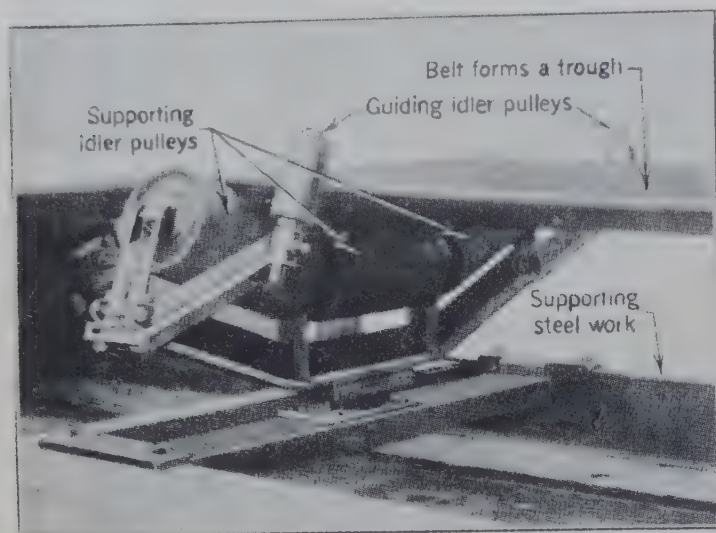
Empty belt conveyor, showing supporting and guiding idler pulleys. (Link-Belt Co.)
